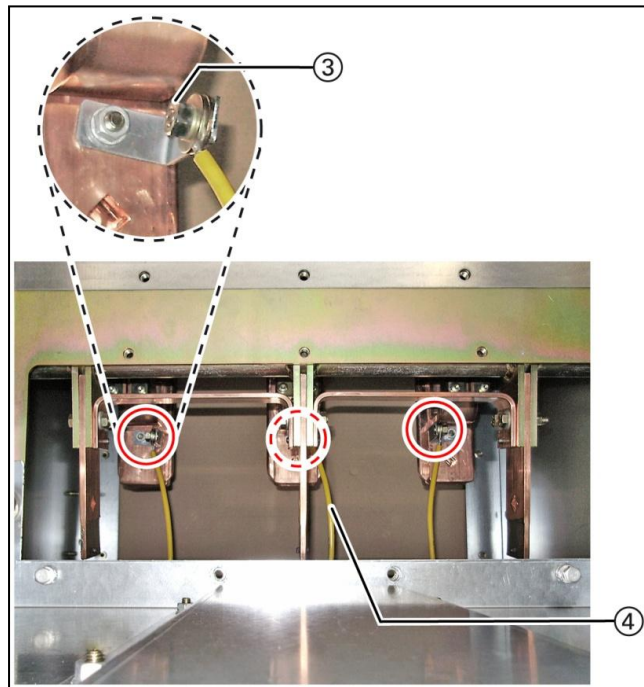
3 bolted joints at the cable connections (central joint covered)
